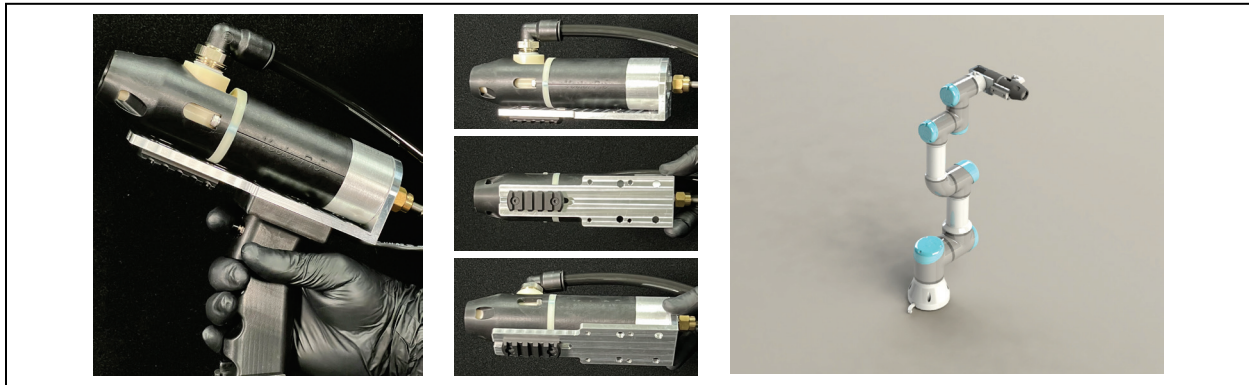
Triad Cluster Spray Applicator (Handheld or Robot Mounted)
